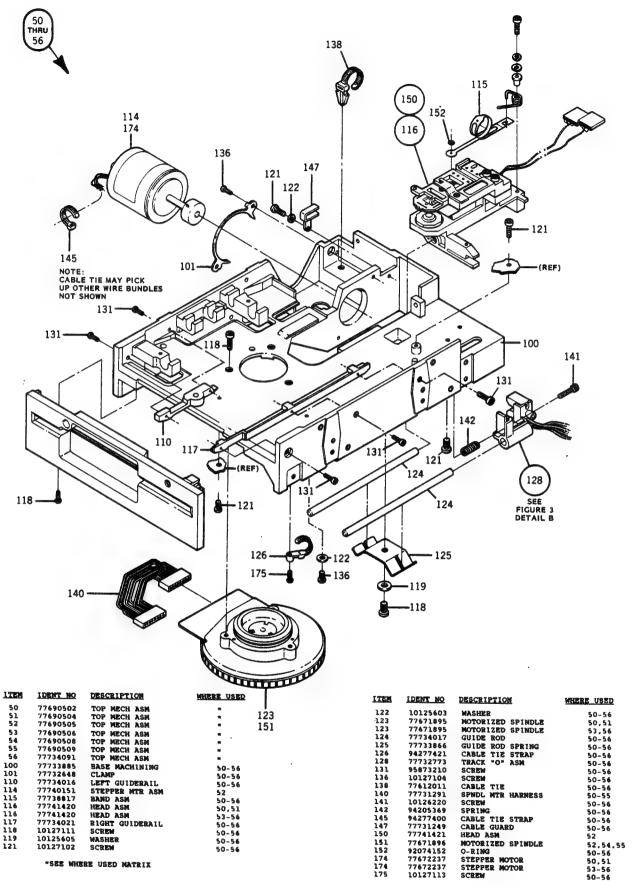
TOP MECH ASSEMBLY (1 OF 2)
